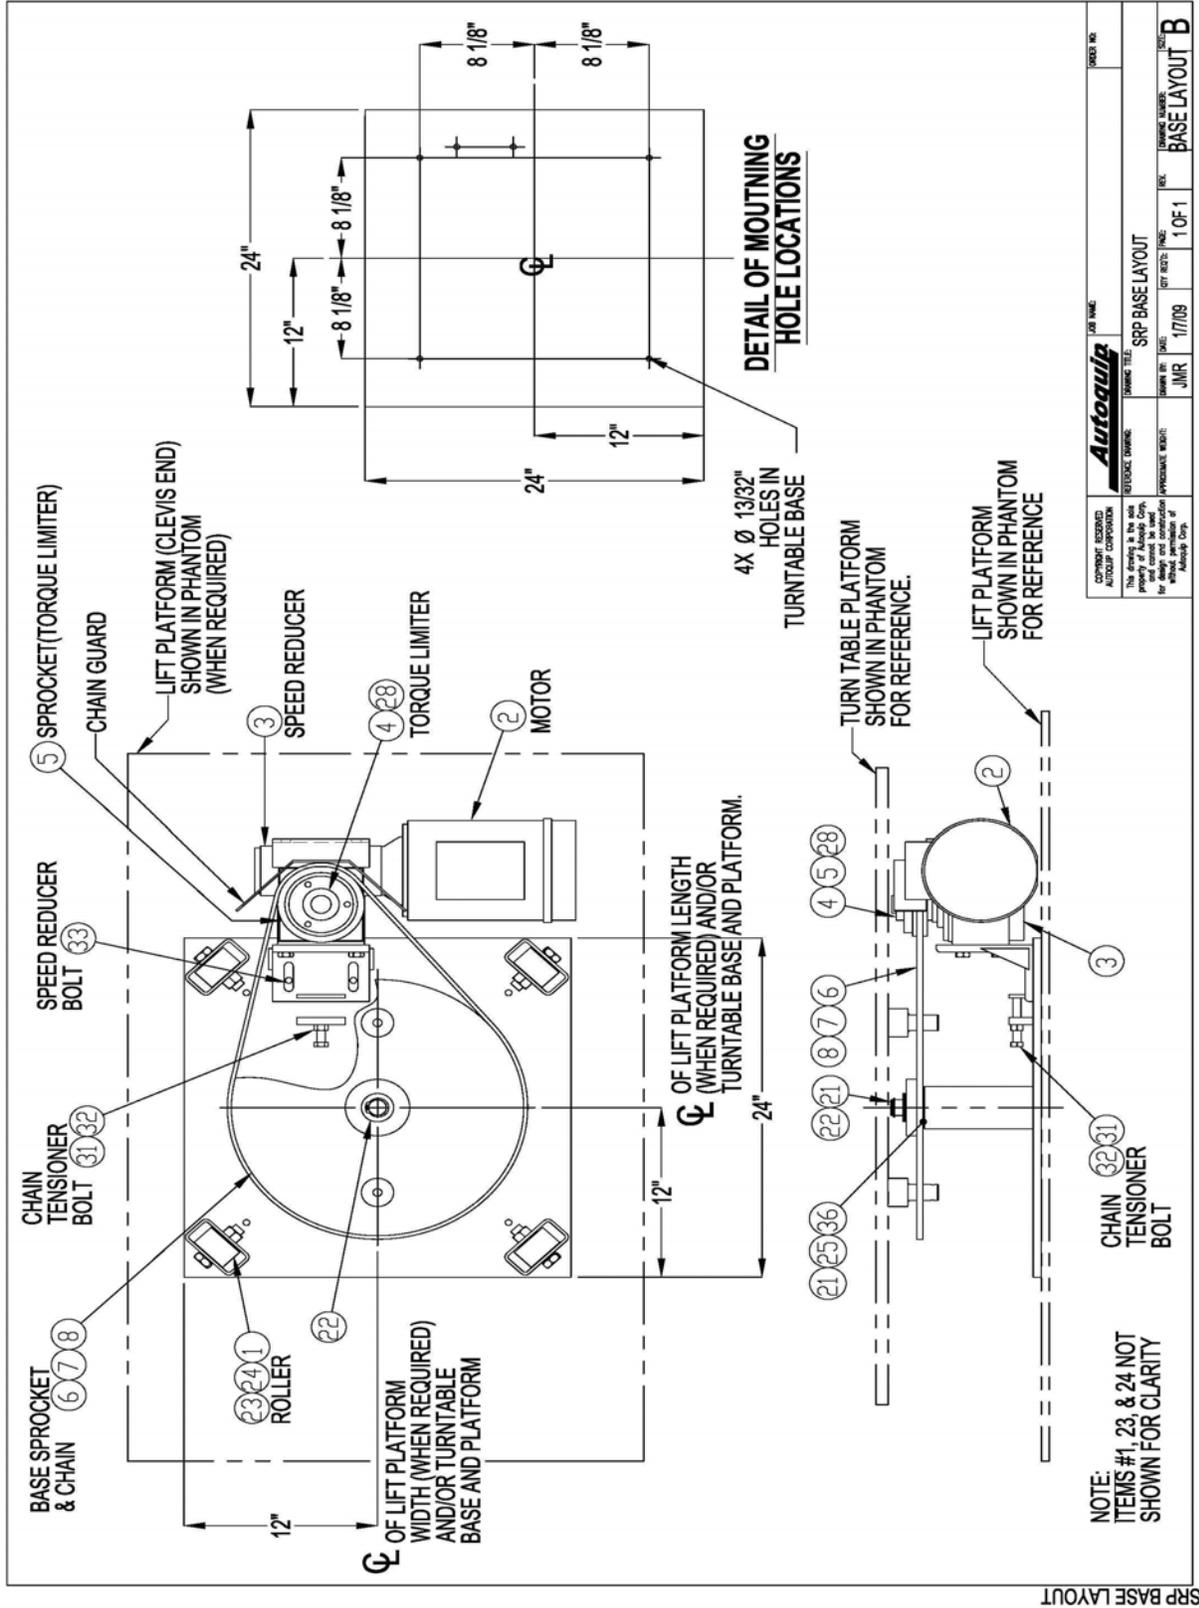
Replacement Parts Layout --Standard "Chain and Sprocket" Design
